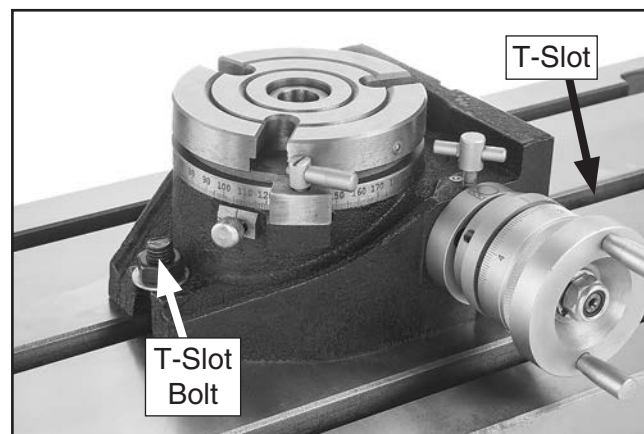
Rotary table mounted using T-bolts, washers, and hex nuts.
